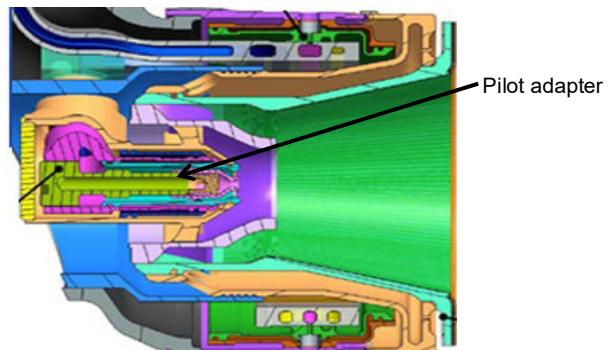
Jet fuel nozzle showing part three (pilot adapter)
